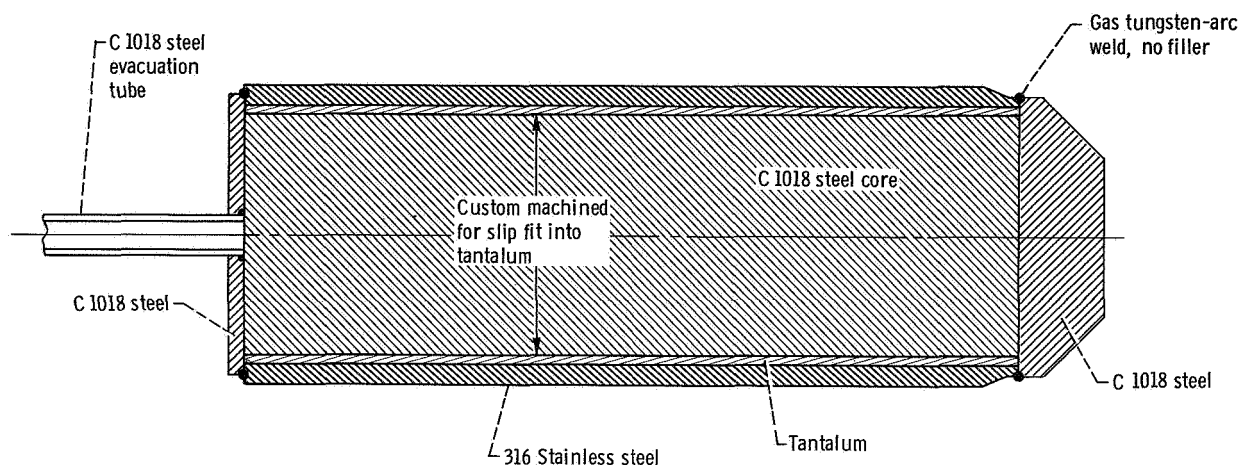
Extrusion billet design for producing tantalum/316 stainless steel tubing using a filled billet method.
